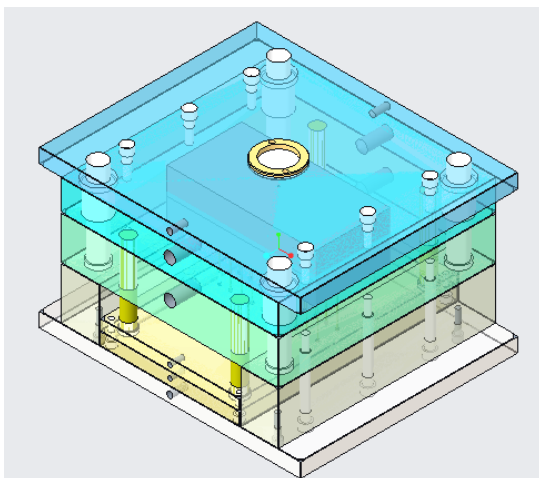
Fixing bolts, nozzle inlet, and pushers placed in the mold
